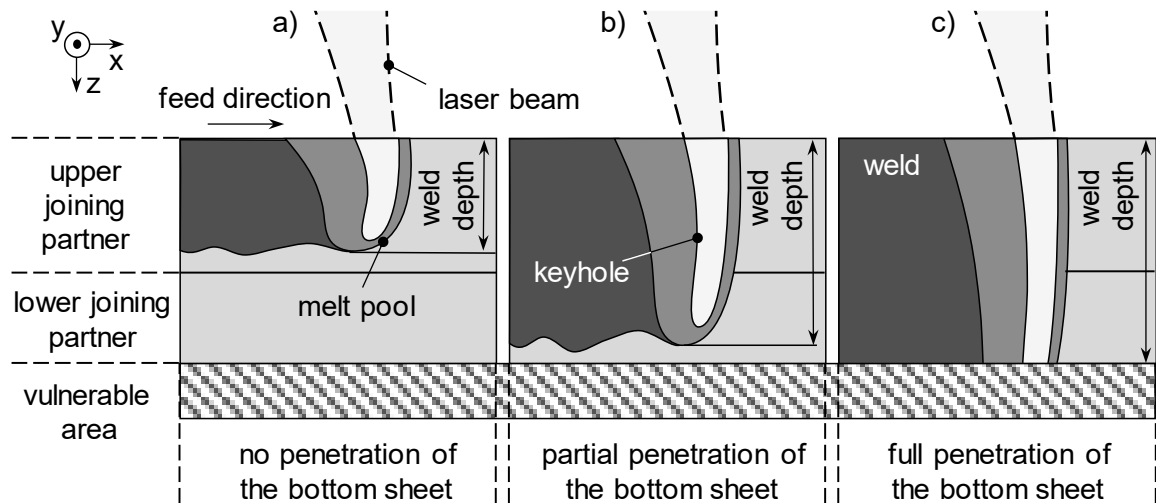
Cross-sectional illustration of a laser welding process for joining two components in an overlap configuration; a) insufficient weld depth; b) desired weld depth; c) full penetration of both joining partners
